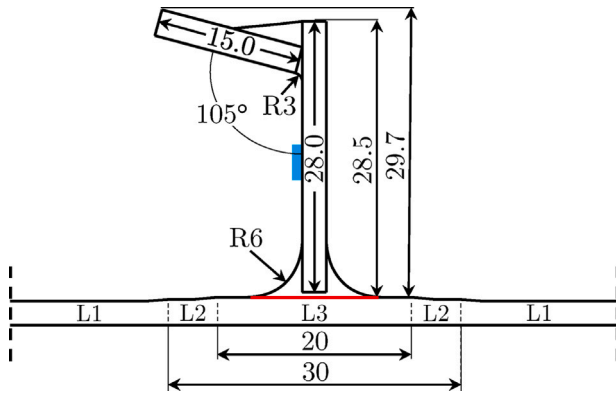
Stringer cross-section (dimensions in mm), with initial damage location and strain gauges highlighted in red and blue, respectively.
